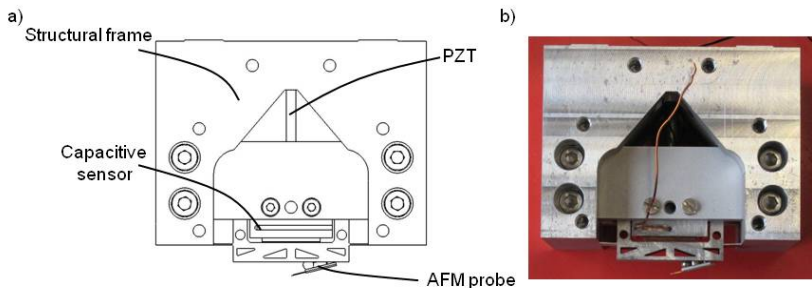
Assembled AFM scanner with cover removed; a) Front view; b) Picture of the AFM scanner with cover removed.
